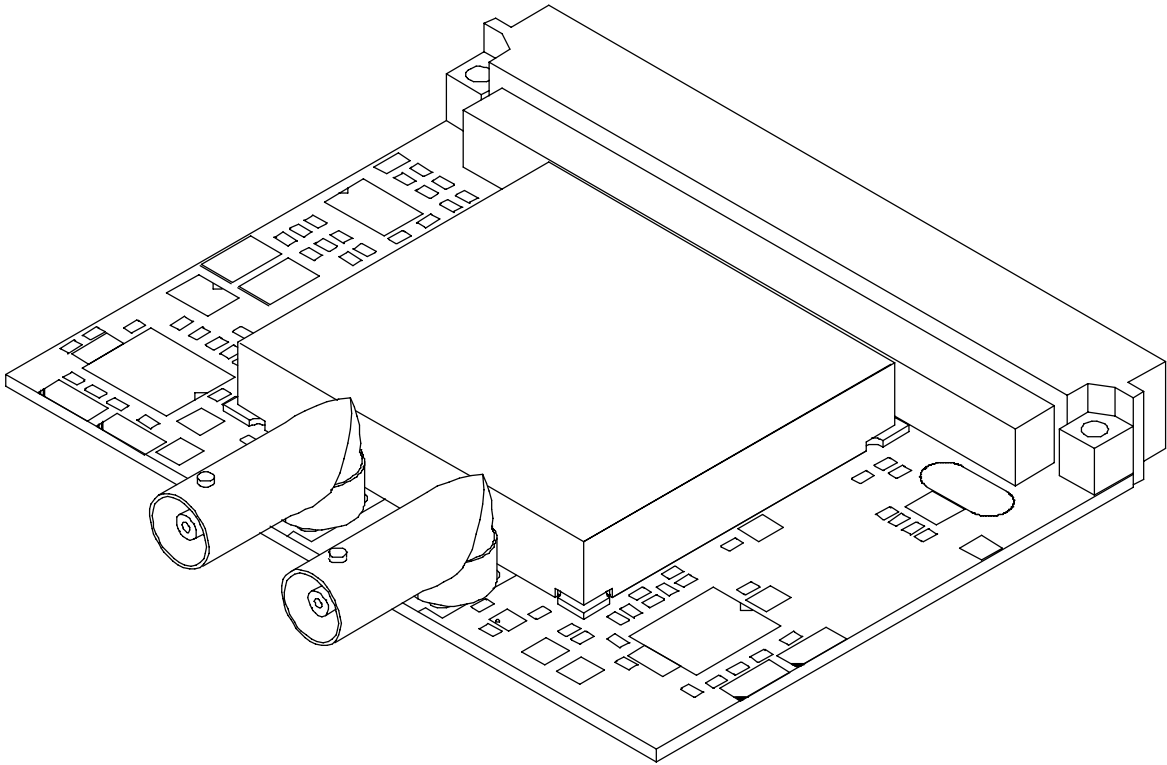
Fig C-e Mortara Receiver Module (MRM-2500) Printed Circuit Board Assembly Complete Ref: 26125-002-50
